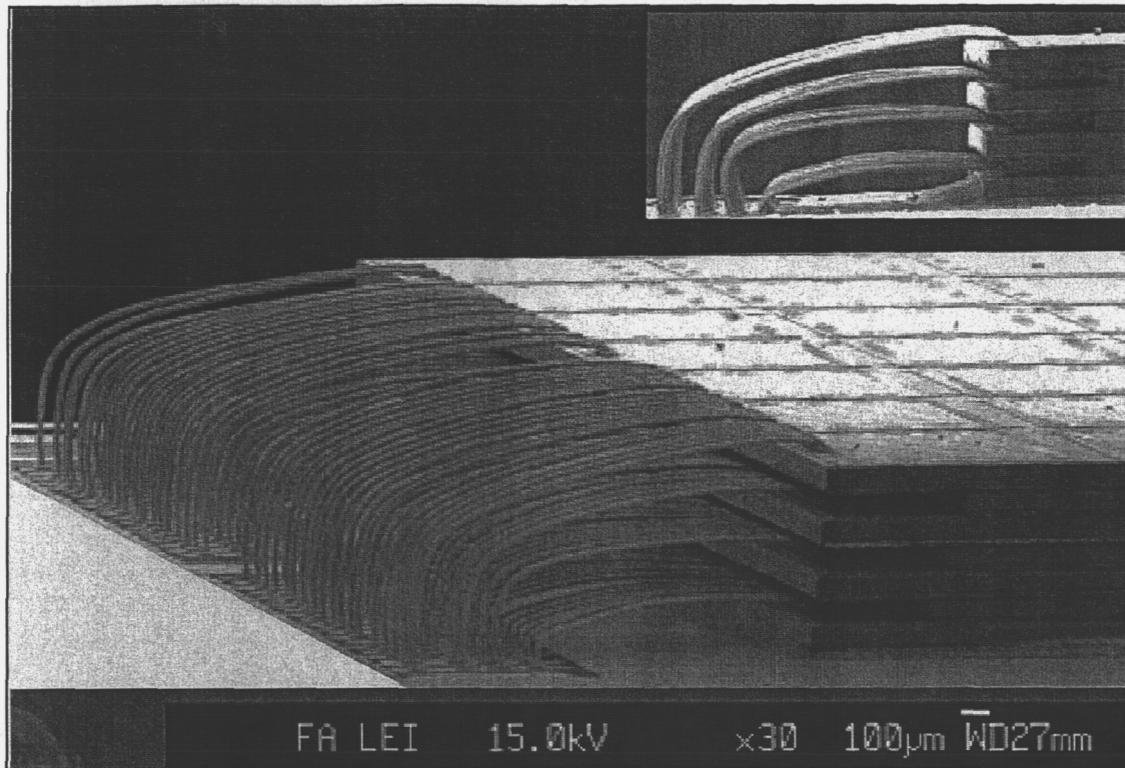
Example of Same-Size Die Stacked Using Silicon Spacers. [Carson.pdf]
